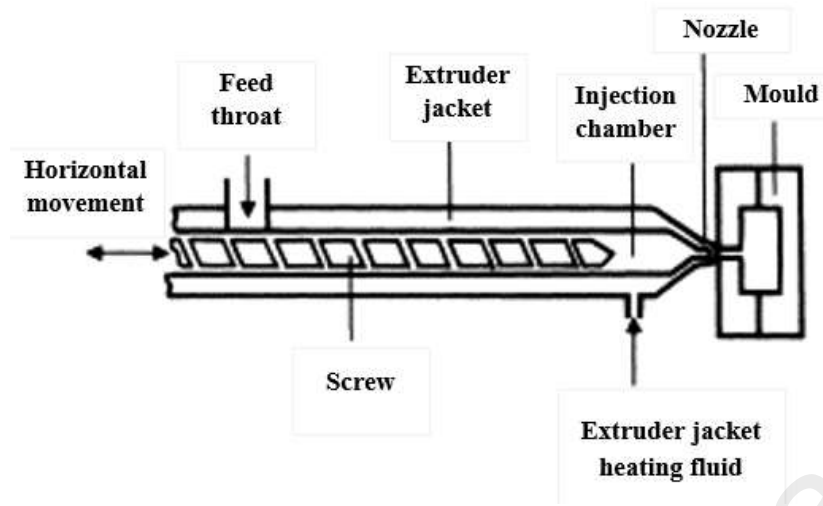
The in-line reciprocating screw type of rubber injection moulding machine. Schematic diagram from A.I. Isayev (1989).
